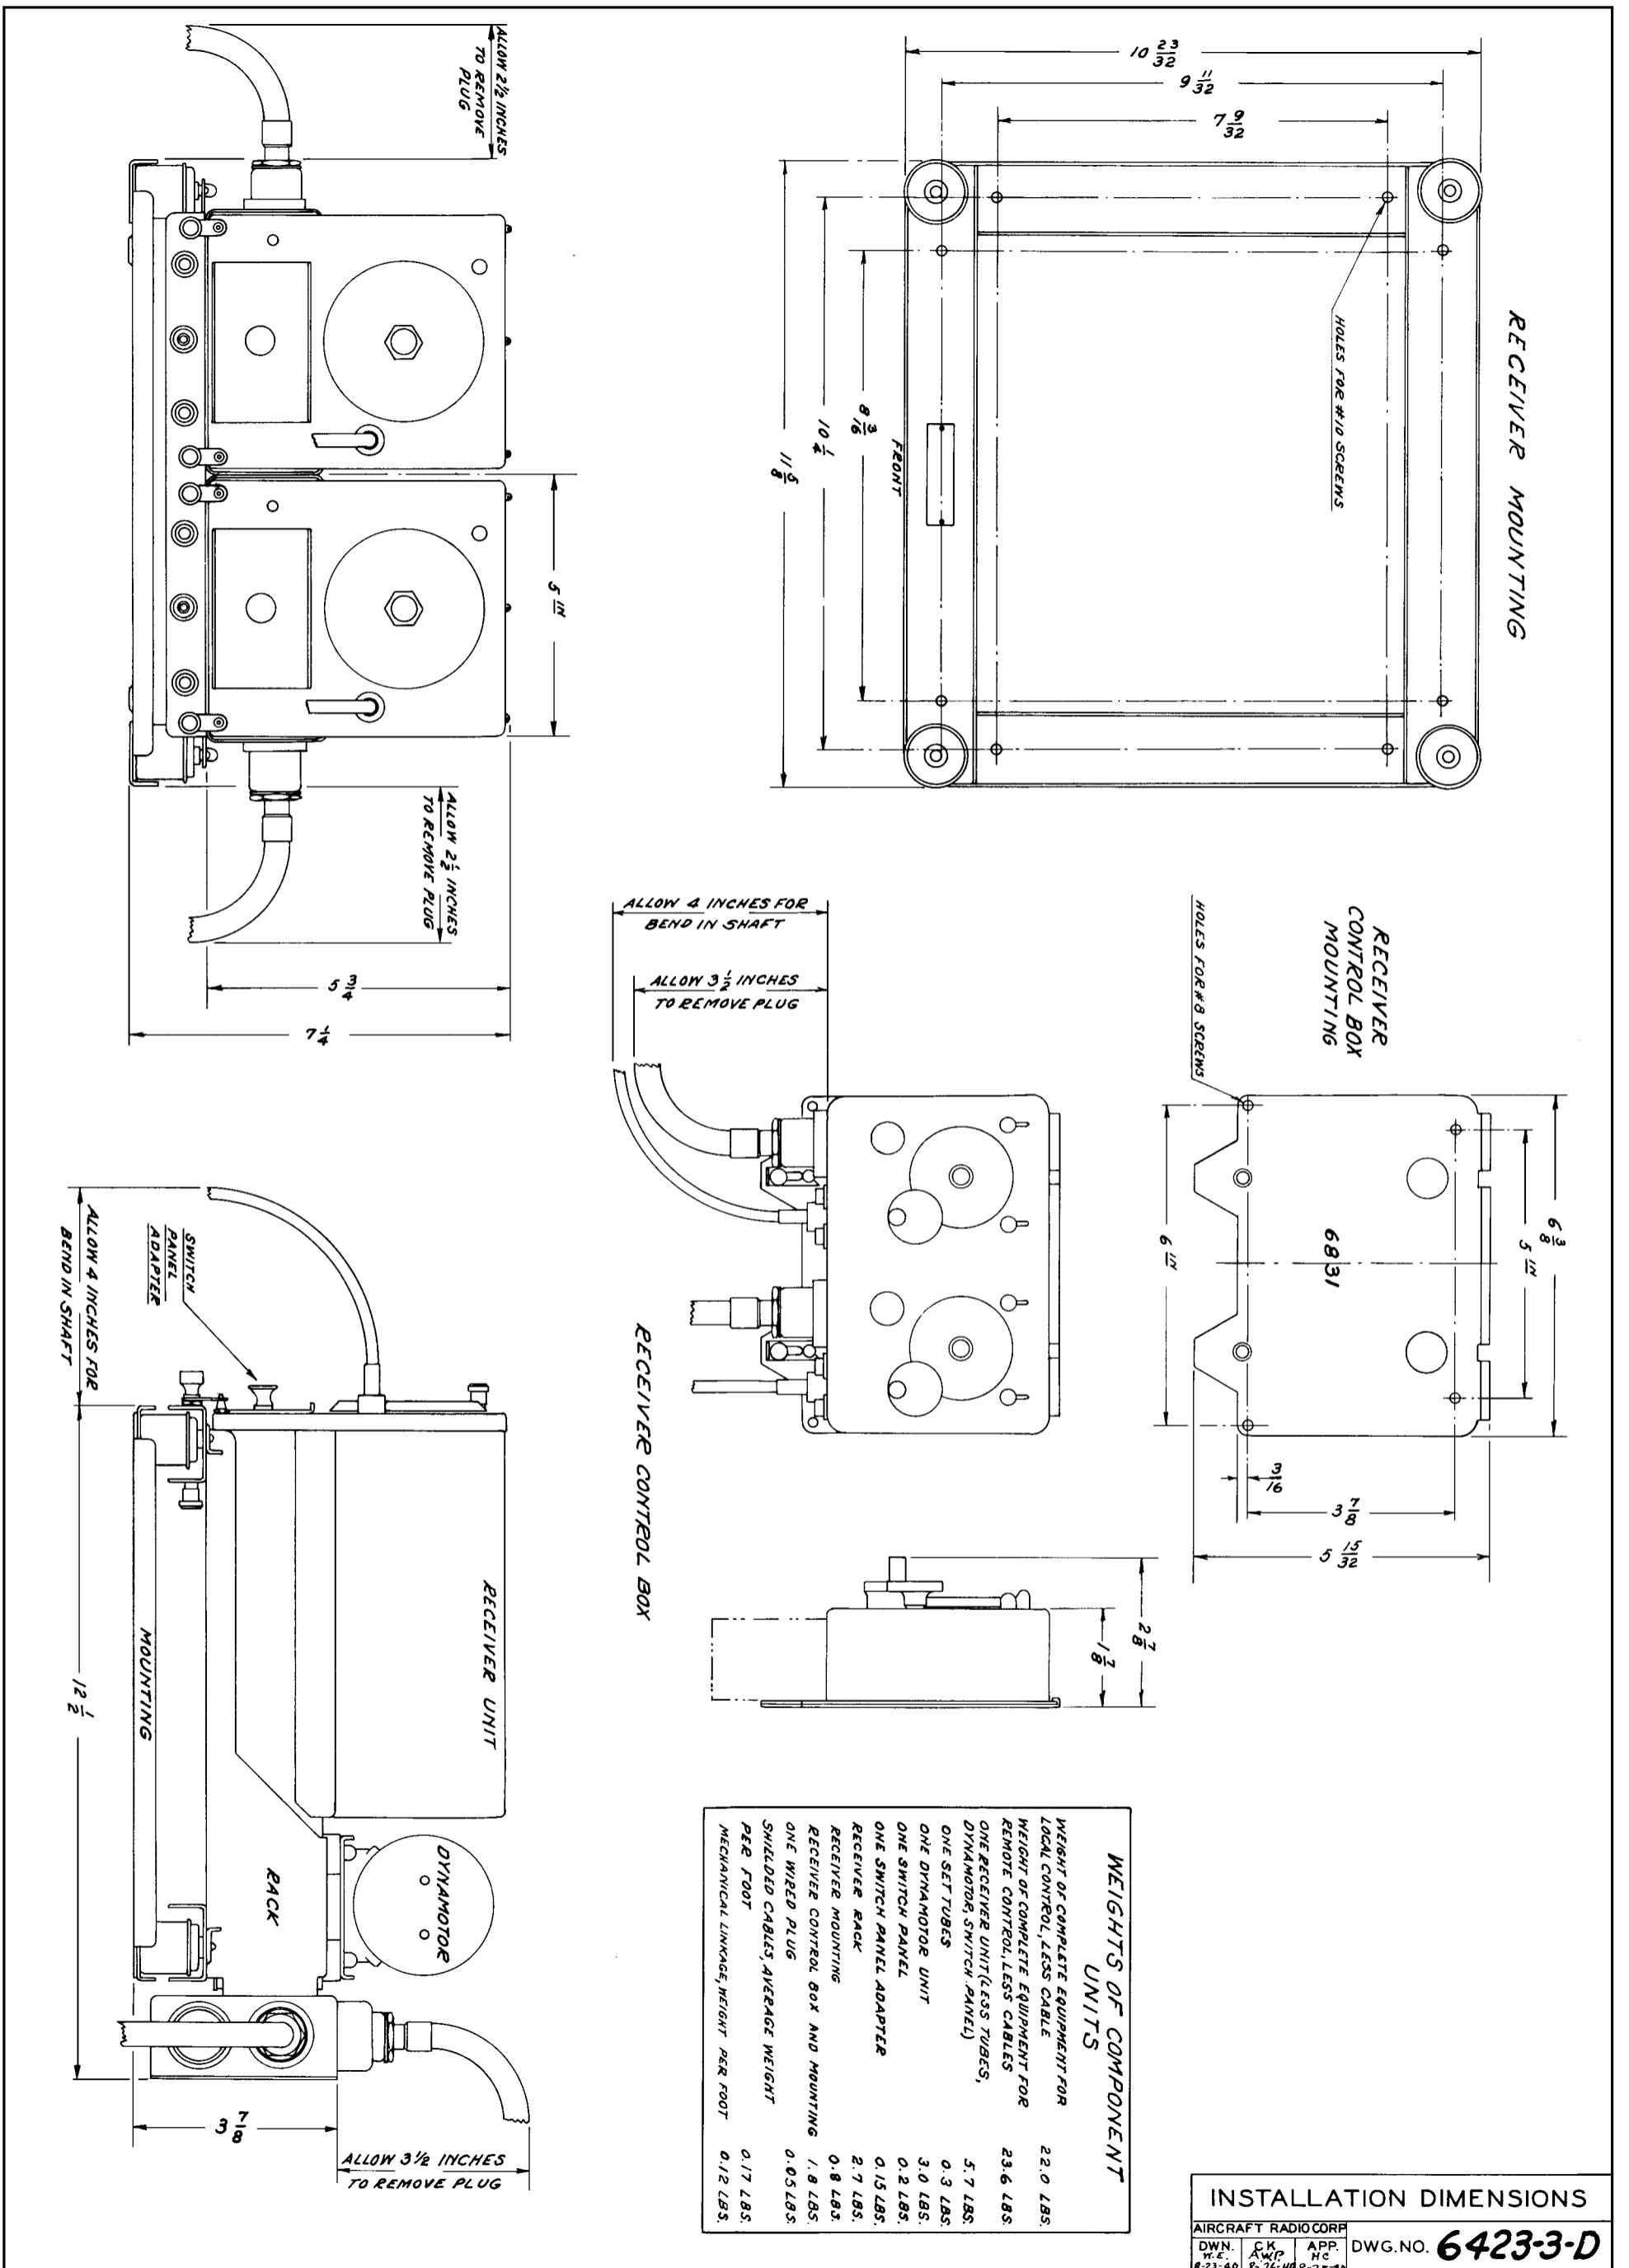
Installation Dimensions and Weights, Units of Model RAT Equipment
